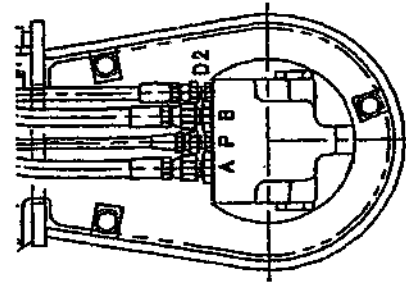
Installing hydraulic pipings (RH-travel motor)
